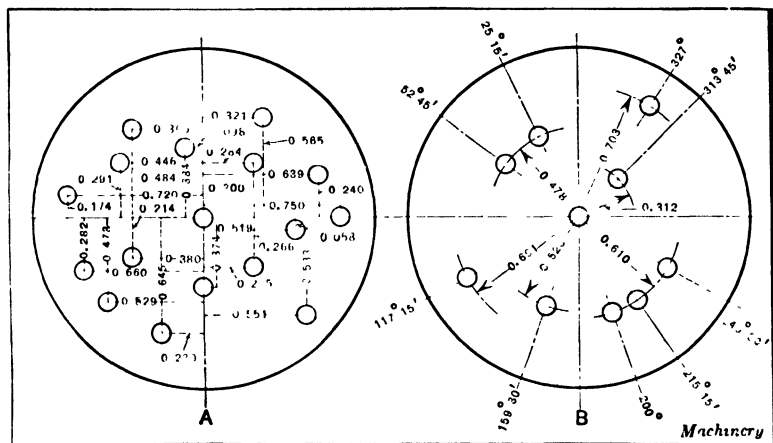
Two Methods of dimensioning Master Plates such as are used in Watch Manufacture
